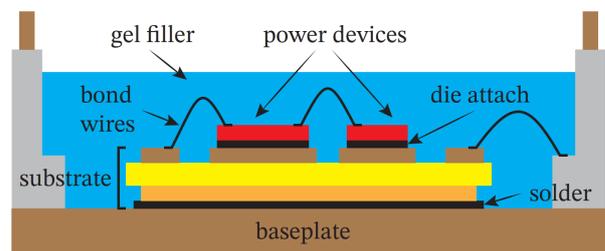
Mockup view of the package cross section showing the power devices (dies with die attachment and bond wires), soldered onto a baseplate. Adapted from [23].
